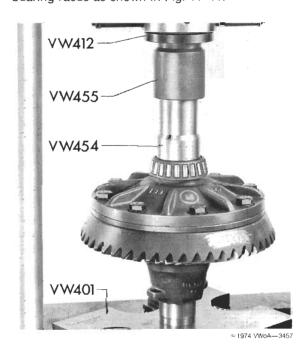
Tapered-roller bearing inner race being pressed onto differential. The press tool mus
